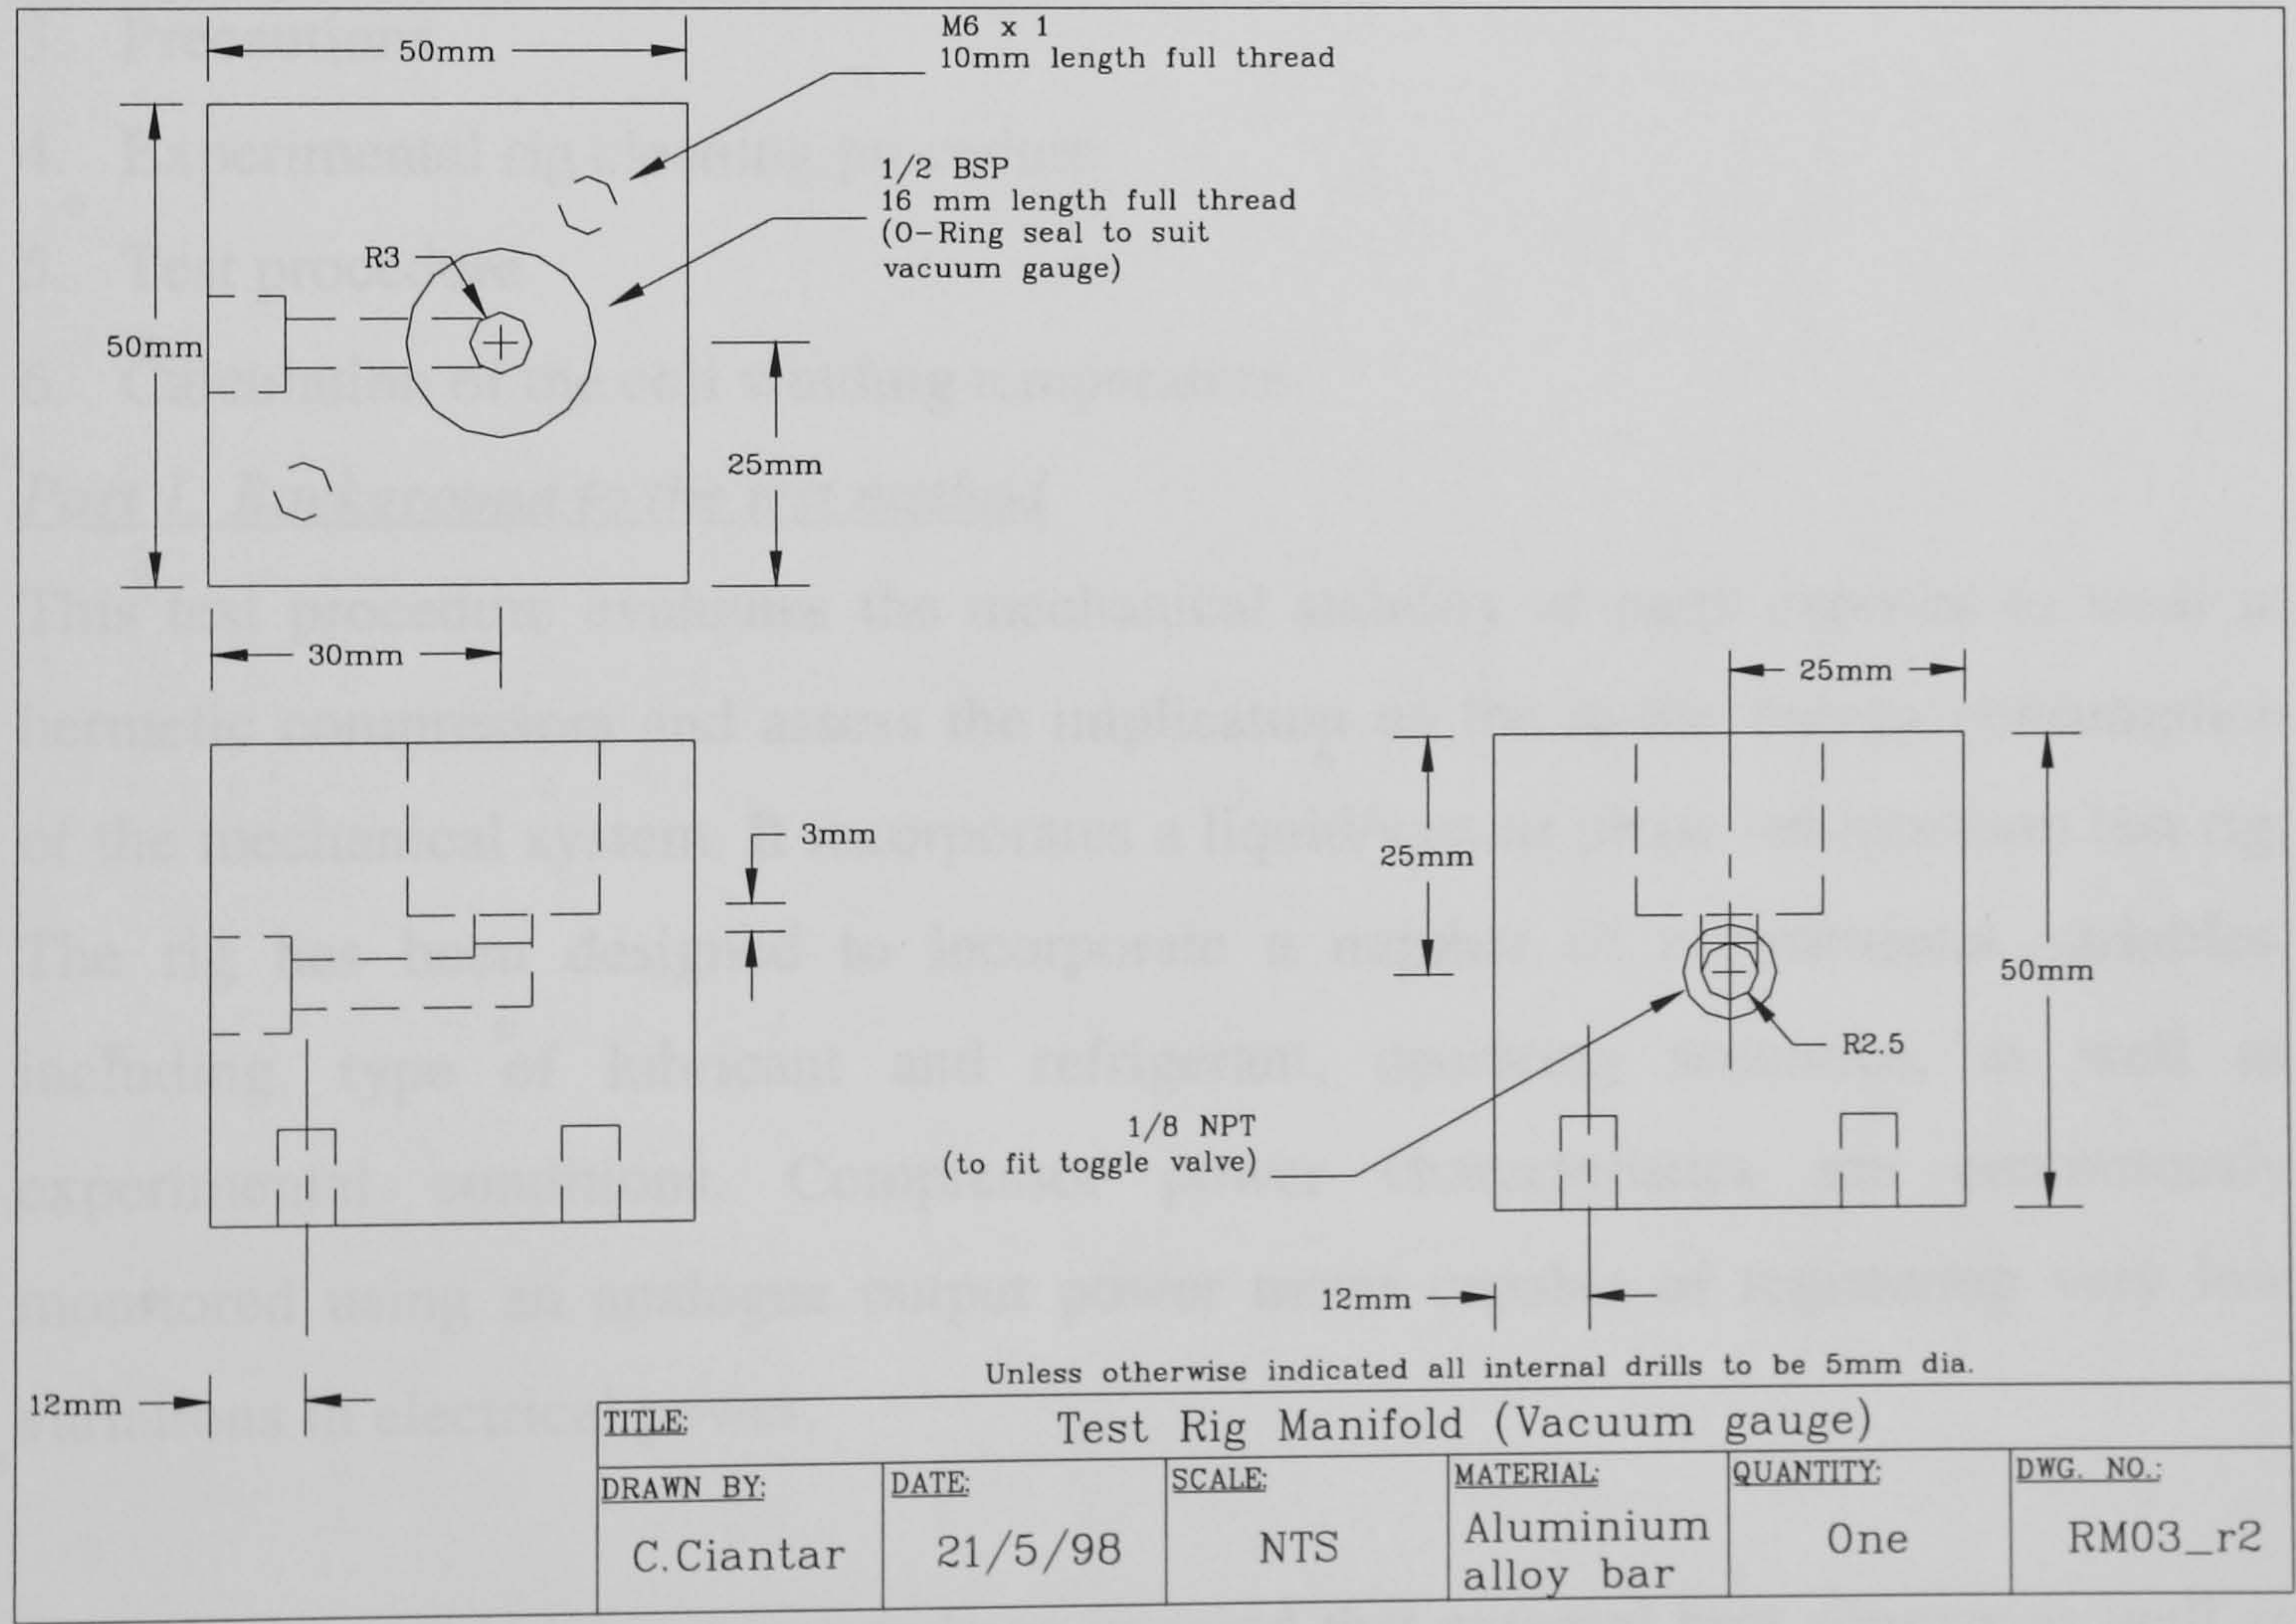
Manifold for vacuum gauge (see Figure 2.1)
